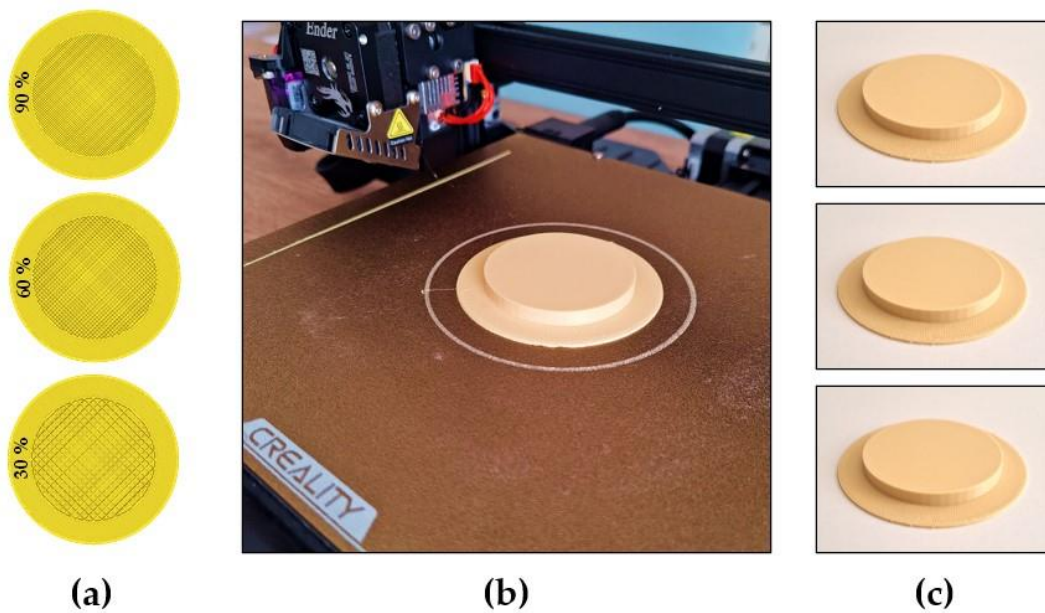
(a) Sliced specimen models in Ultimaker Cura 5.3.1, (b) printing one specimen at a time, (c) final printed specimens
